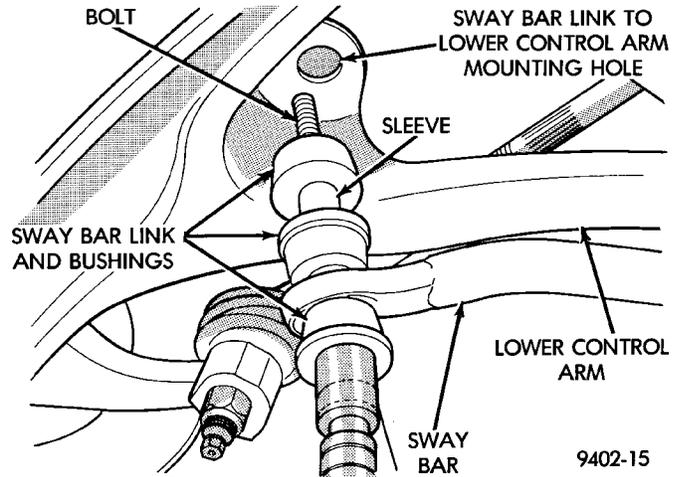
Stabilizer Bar Link To Control Arm Attachment
